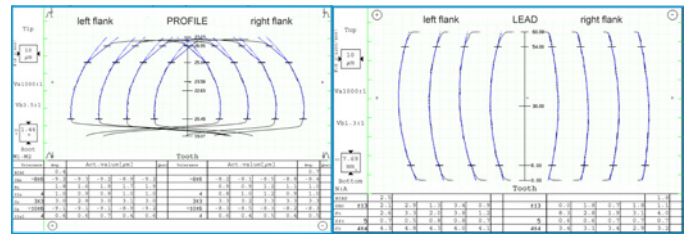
Profile and lead measuring chart of ring gear, module 2.4.
